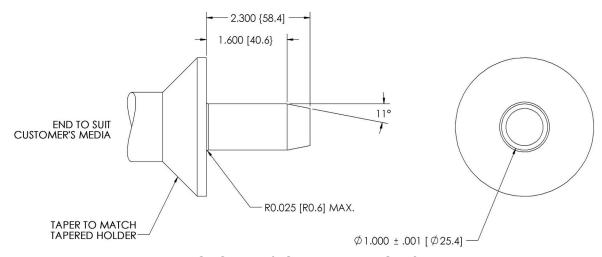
STC0612 & SM0612 Tool Shaft Drawing
